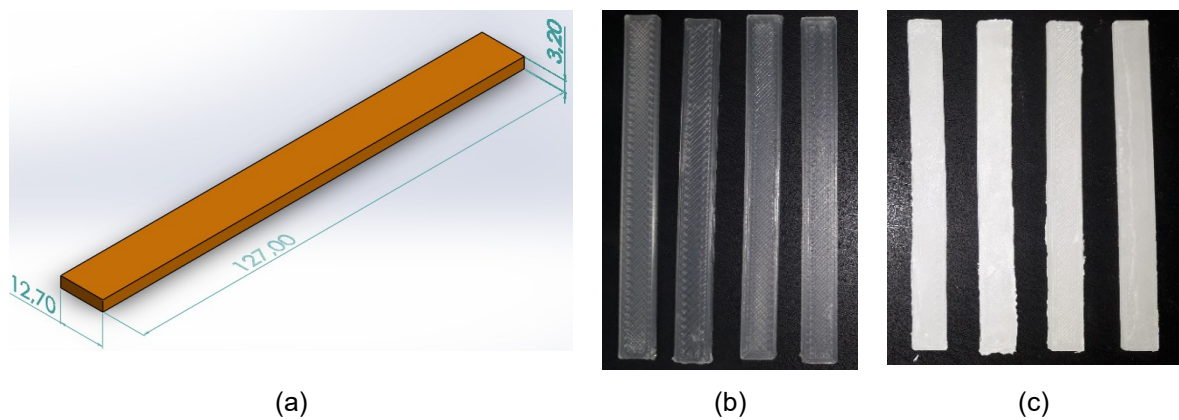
(a) Sample geometry. (b) Specimens as printed and (c) after coating generation.
